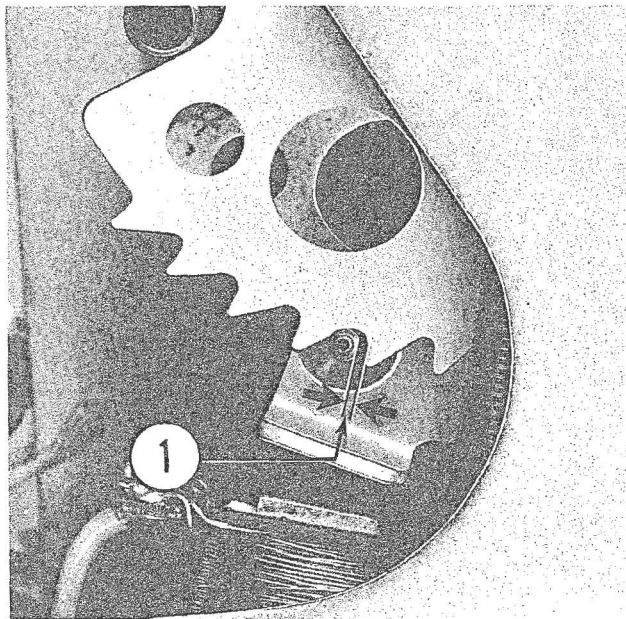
ECCENTRIC CAM ADJUSTMENT FOR CANCEL STROKE
